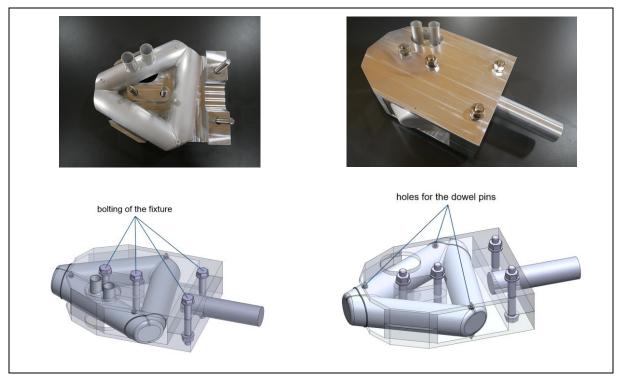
Fixture for welding of the hydrogen vessel
